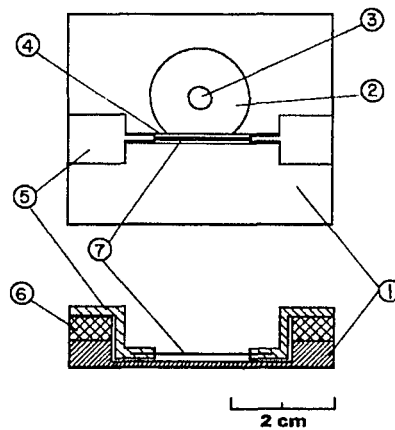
Scale drawing of anode extractor with embedded Cs dispenser. The labelled elements are (1) stainless steel mounting plate, (2) molybdenum anode, (3) 4-mm-diameter anode aperture, (4) cesiator mounting slot, (5) Macor insulating supports, (6) copper mounting blocks, and (7) cesiator crimped in copper blocks.
